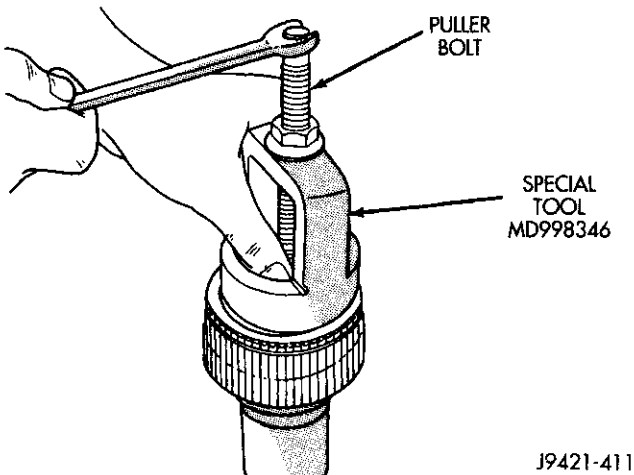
Tightening Puller Bolt To Seat Jaws Under Bearing
